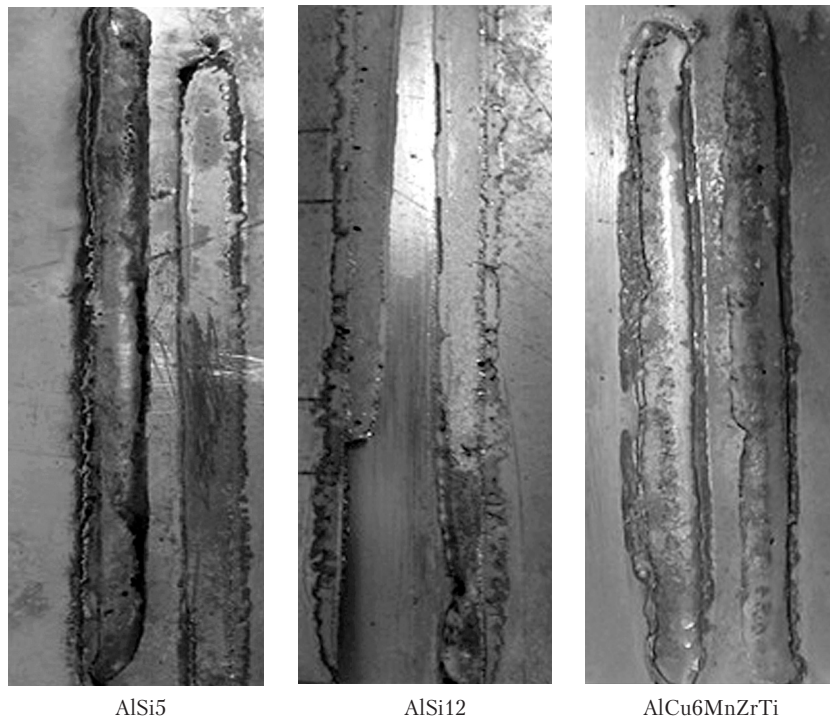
Samples were made by MIG / CMT welding-brazing
